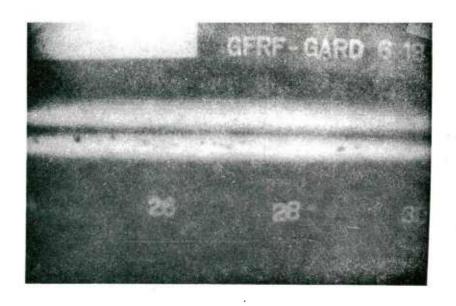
RADIOGRAPHY - COARSE POROSITY IN WELD A/PT8
